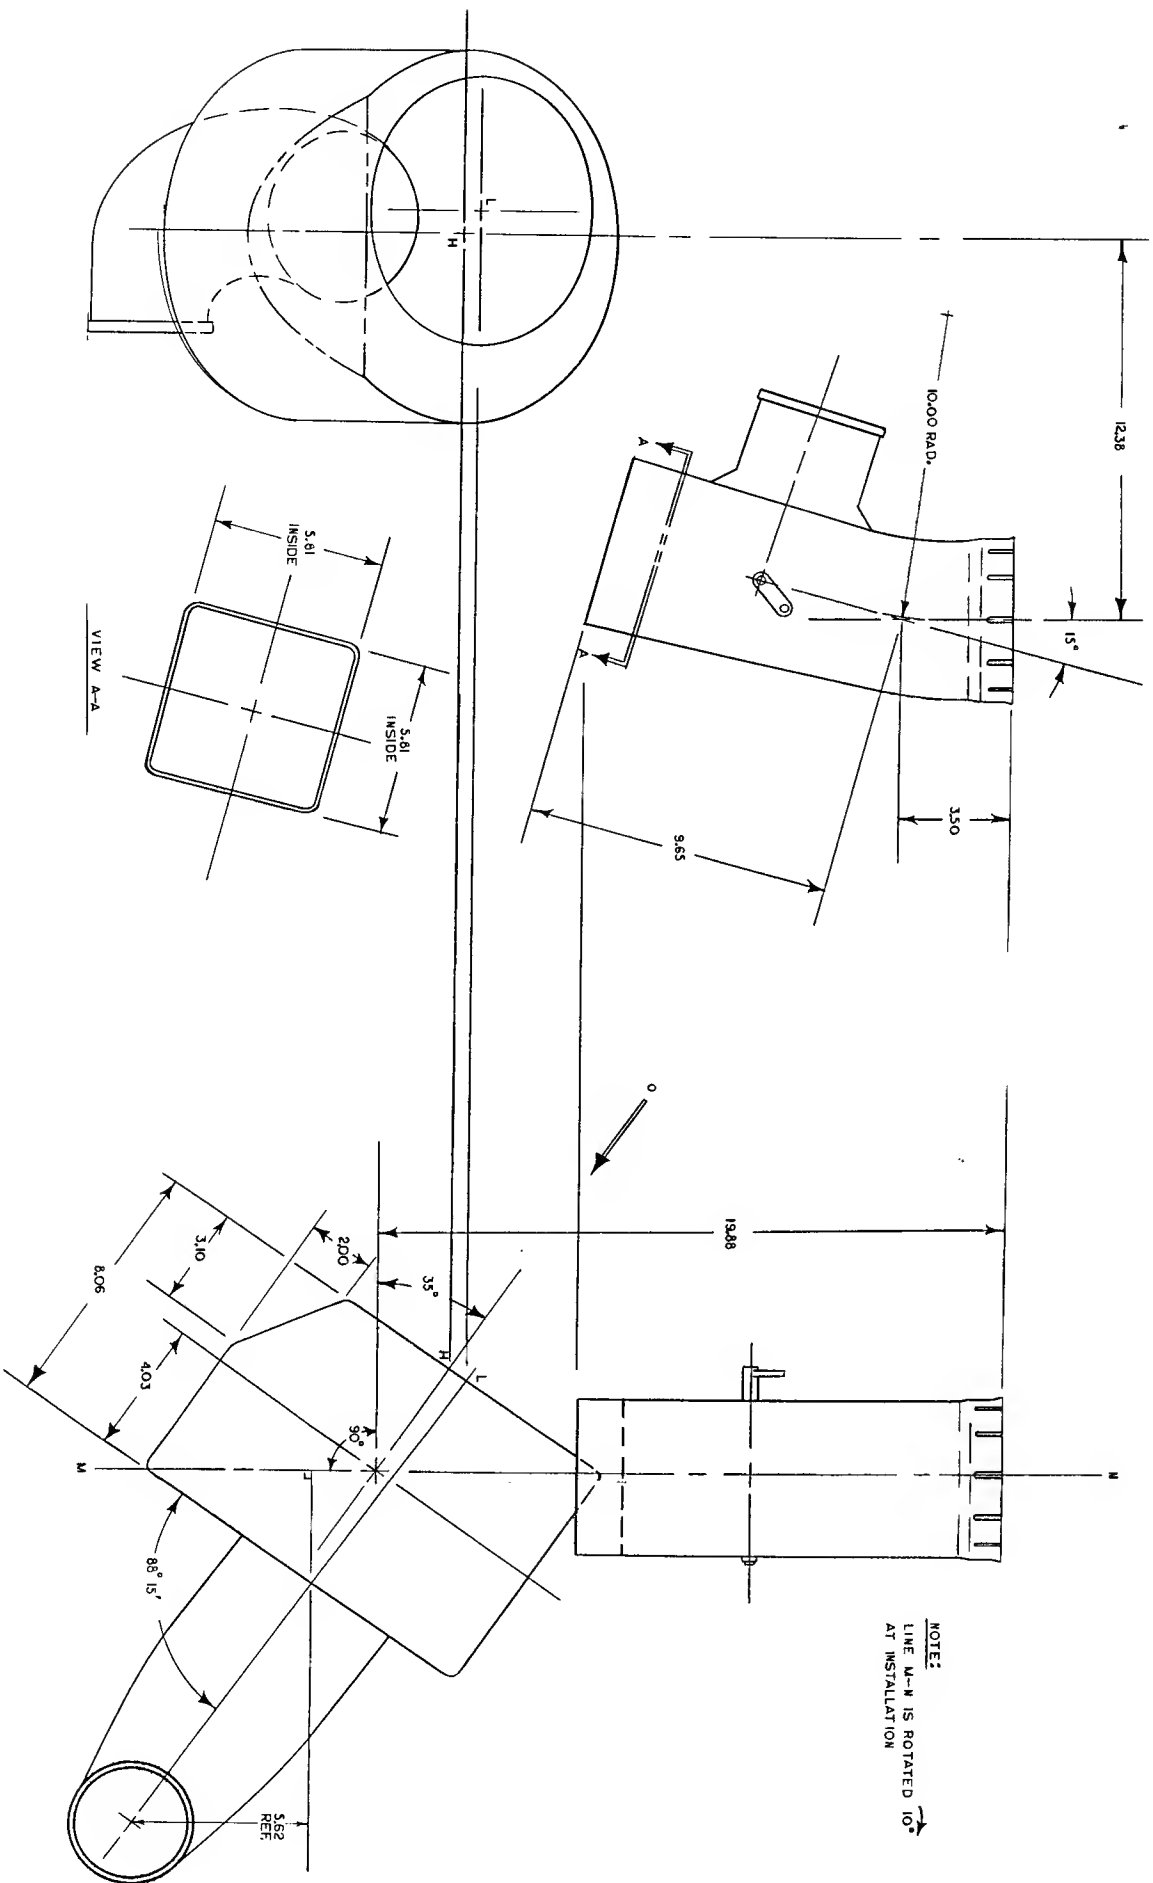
A1 FILTER HOUSING AND SHUTTLE VALVE ORIENTATION
